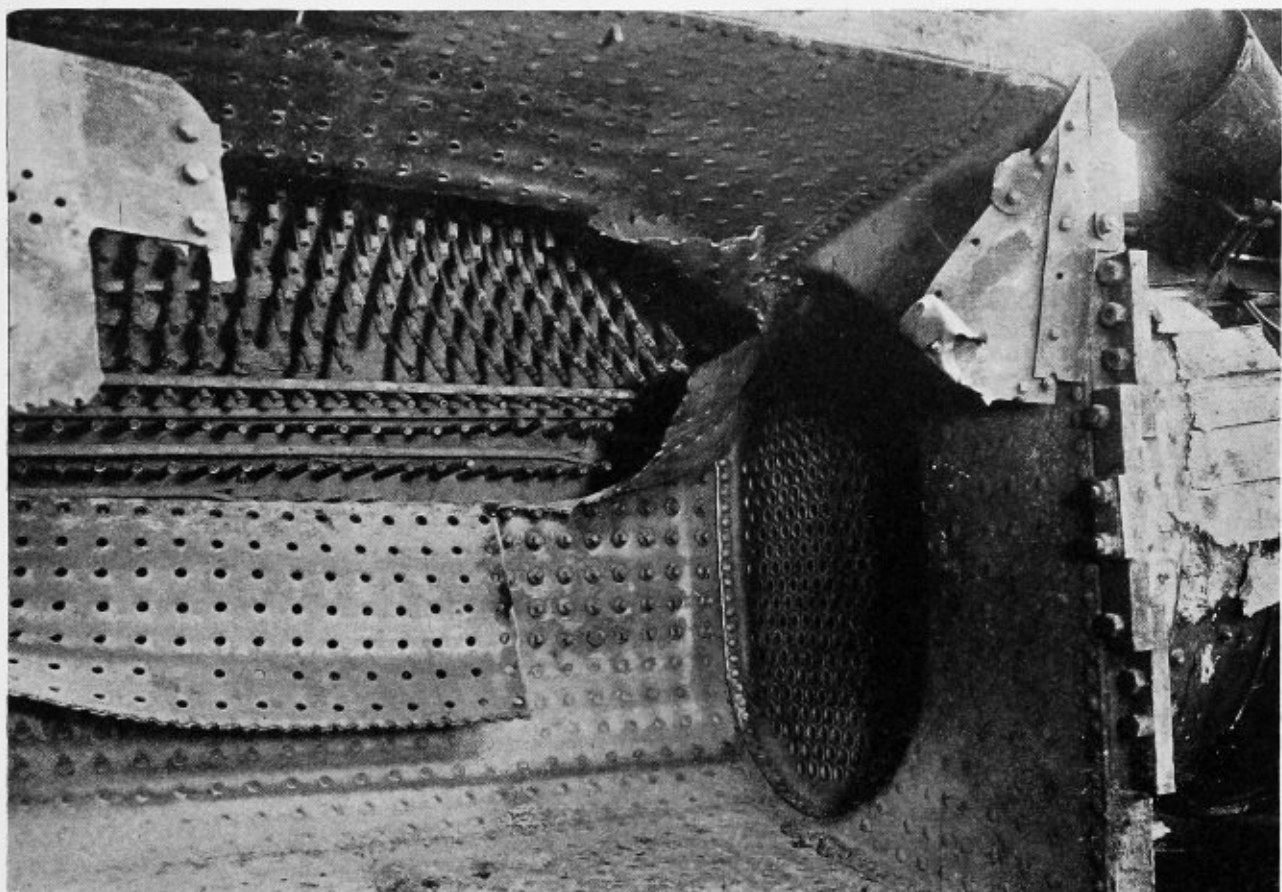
Results of Explosion Caused by Low Water, in Which the Welded Seam Between the Crown and Side Sheets Gave Way
